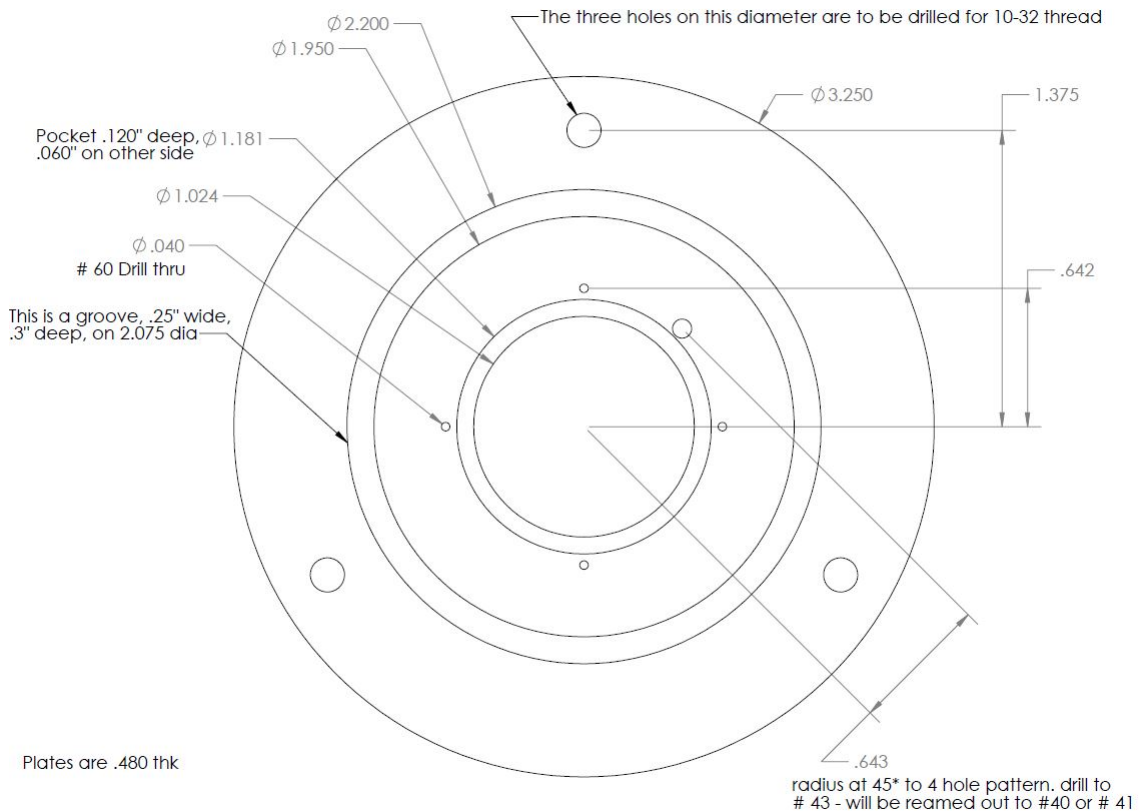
Target holder plate, demonstrating breakaway groove and tilt adjustment enhancement. All dimensions in inches.
